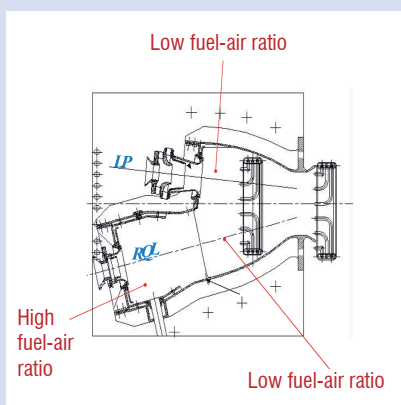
02 - Lengthwise section of a two-head LPP-RQL combustor
